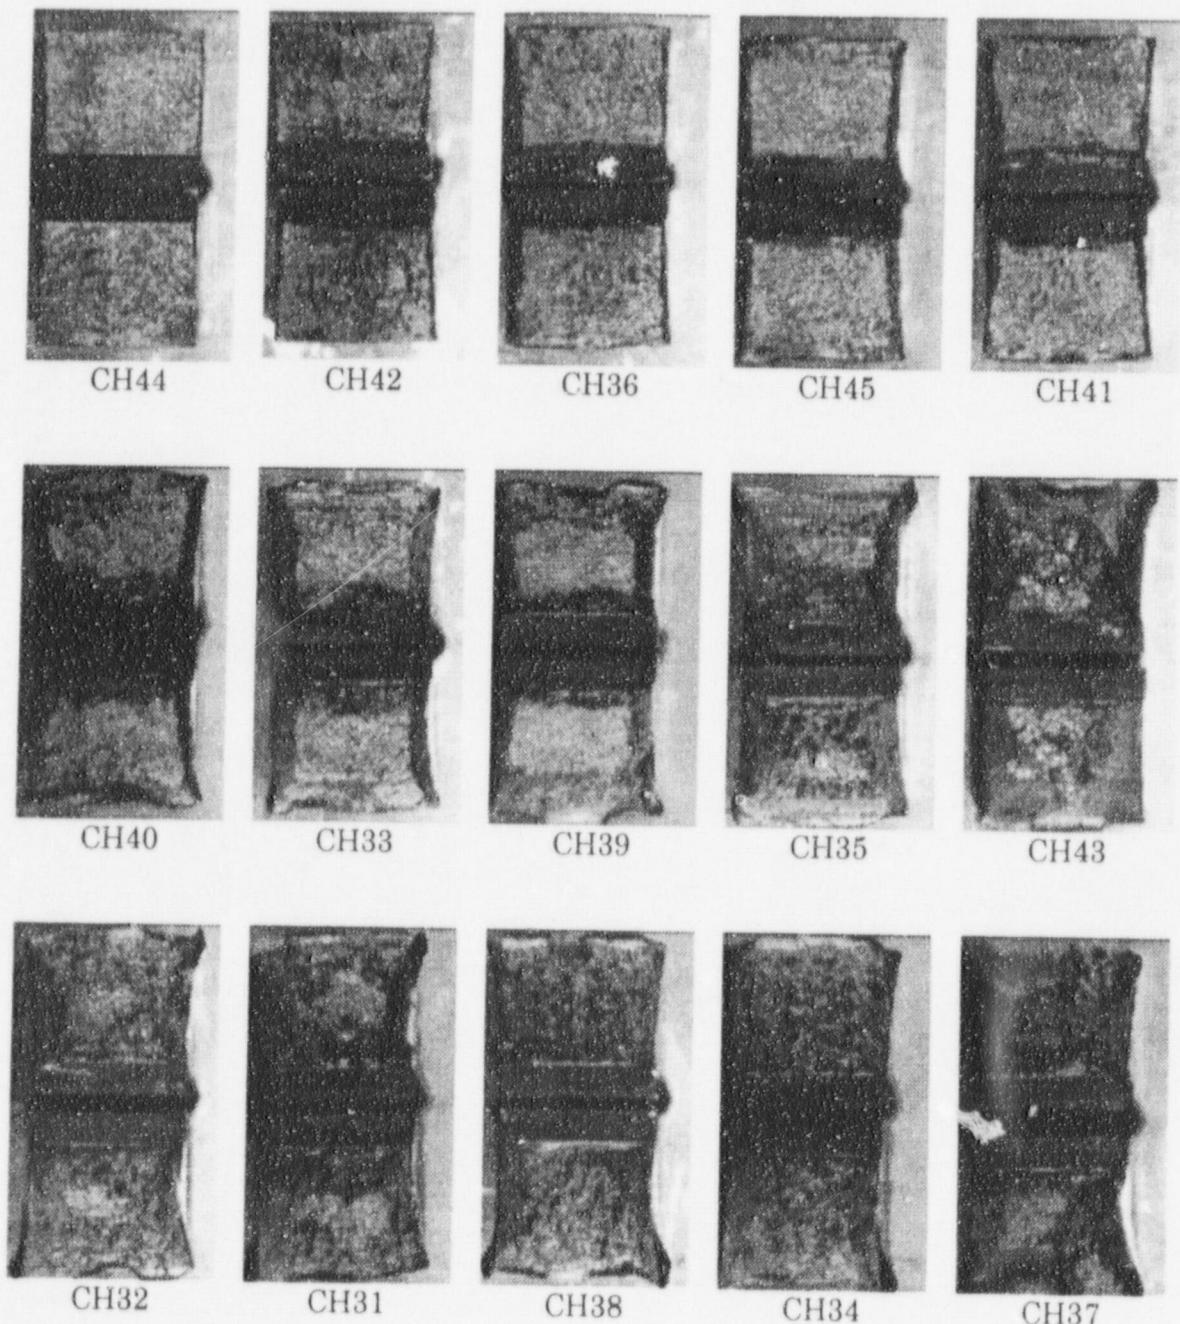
Charpy Impact Specimen Fracture Surfaces for V.C. Summer Unit 1 Reactor Vessel Heat-Affected-Zone Metal
